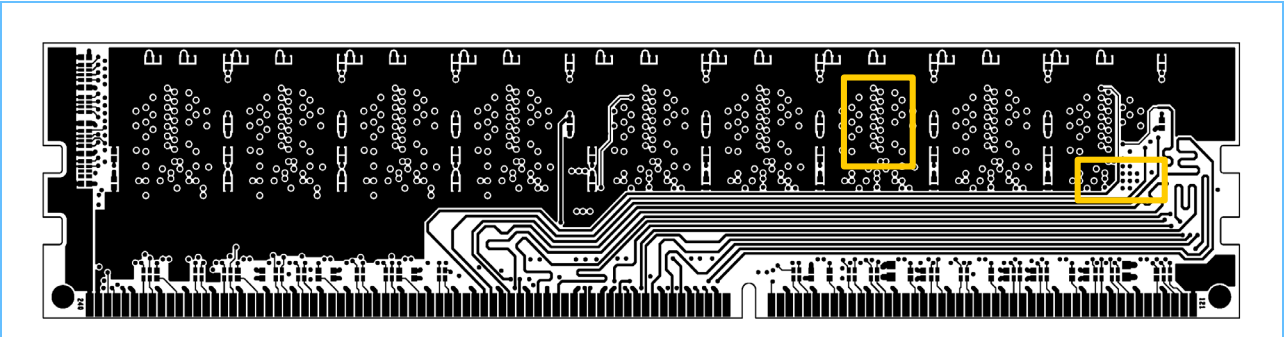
Test Point Identification (Raw Card Version D): Back Side, Full Board View
